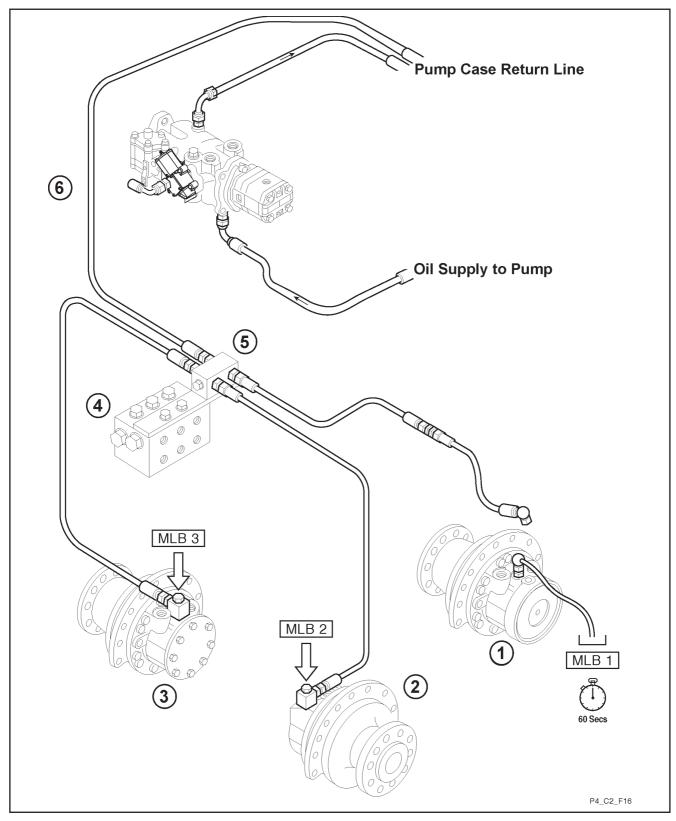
HYDROSTATIC WHEEL MOTOR LUBRICATION LEAKAGE TEST
